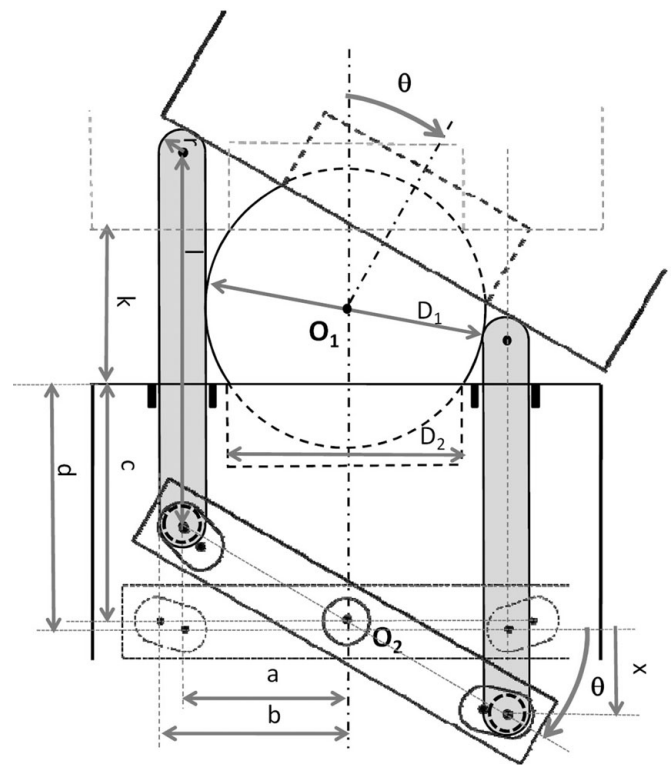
Side view of the bending mechanism showing design parameters for a 1 DOF bending.
